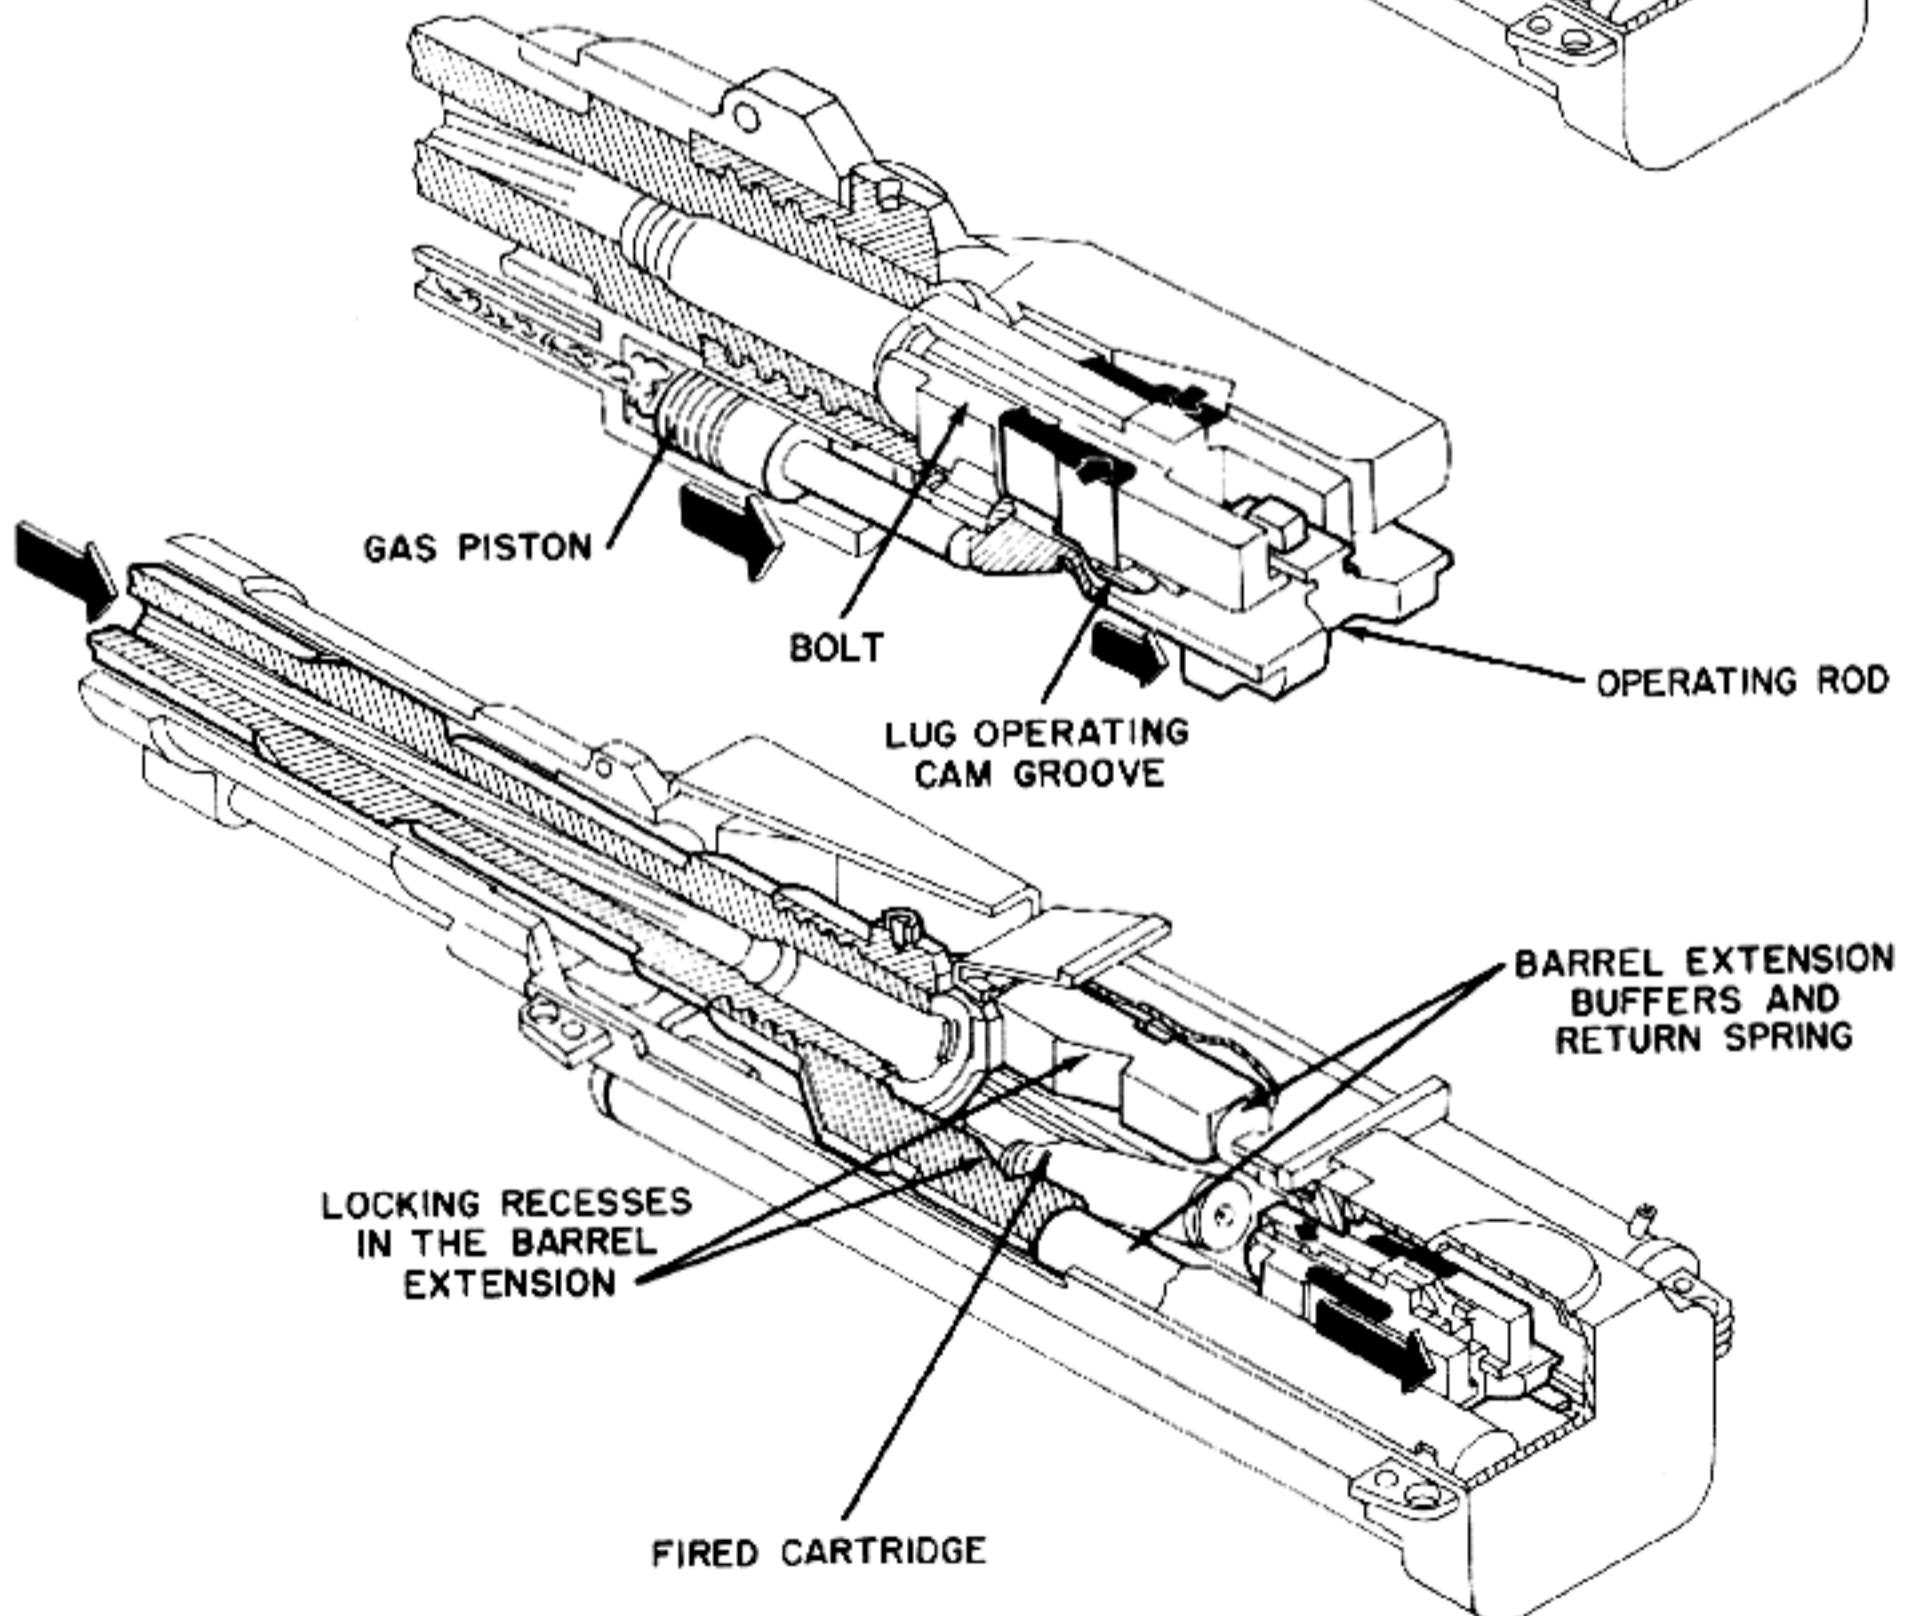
Cammed Surfaces on Operating Rod Unlock Locking Lugs From Barrel Extension.
